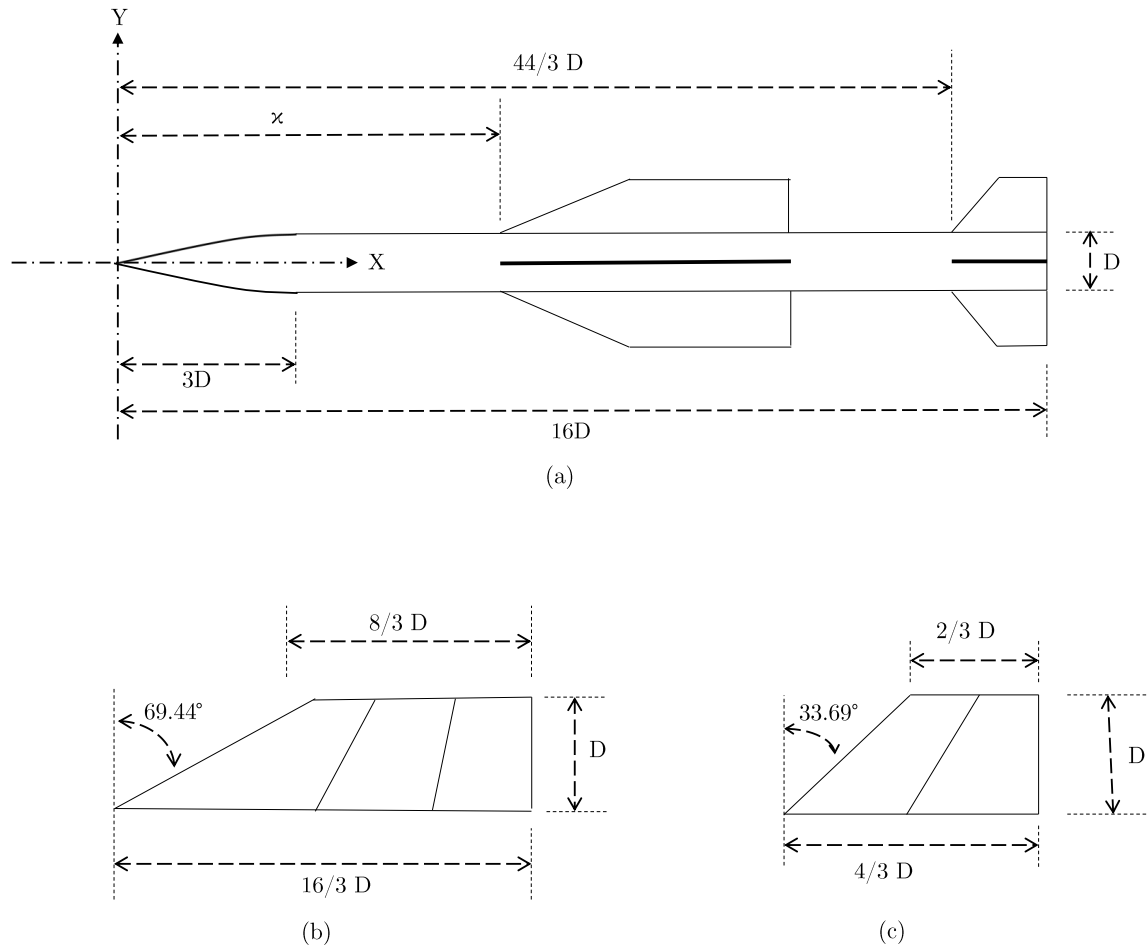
Geometrical Representation: (a) Missile Body Dimensions, (b) Wing Dimensions, and (c) Fin Dimensions
